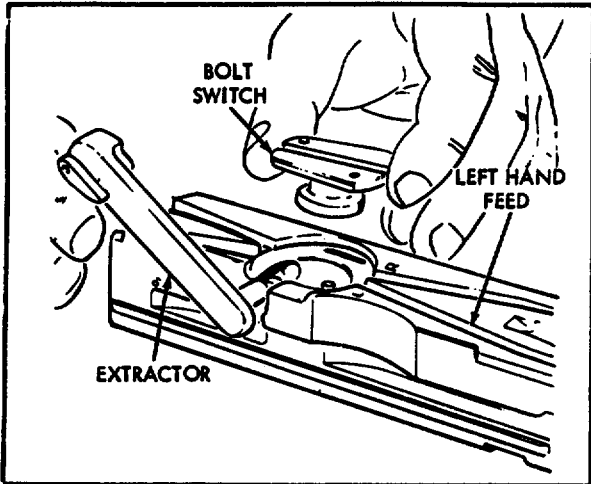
Disassembly/assembly - cal..50 machine gun, M2, HB (1 of 4)
